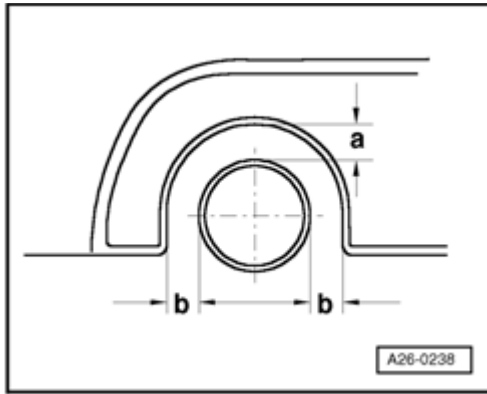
Aligning Tailpipe In Bumper Cut-Out
